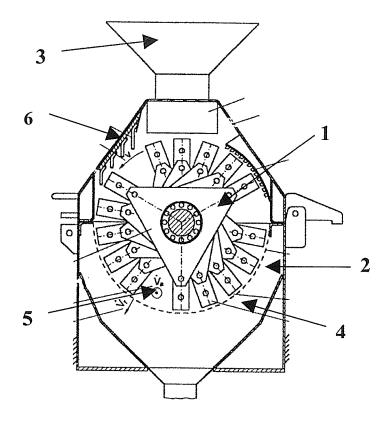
Modified hammer mill (Furl and Hempel 2000) 1-Rotor, 2-Casing, 3-Inlet, 4-Screen, 5-Outlet, 6- Impact elements
